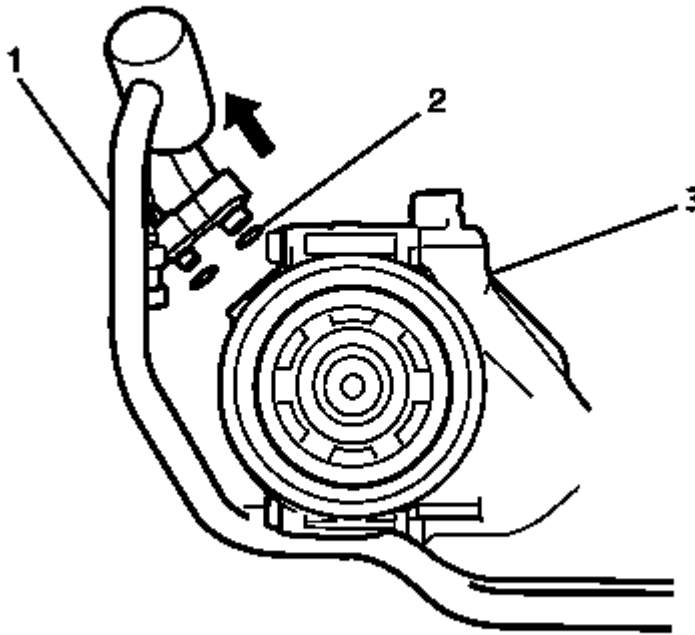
Identifying Suction/Discharge Pipes & Compressor
